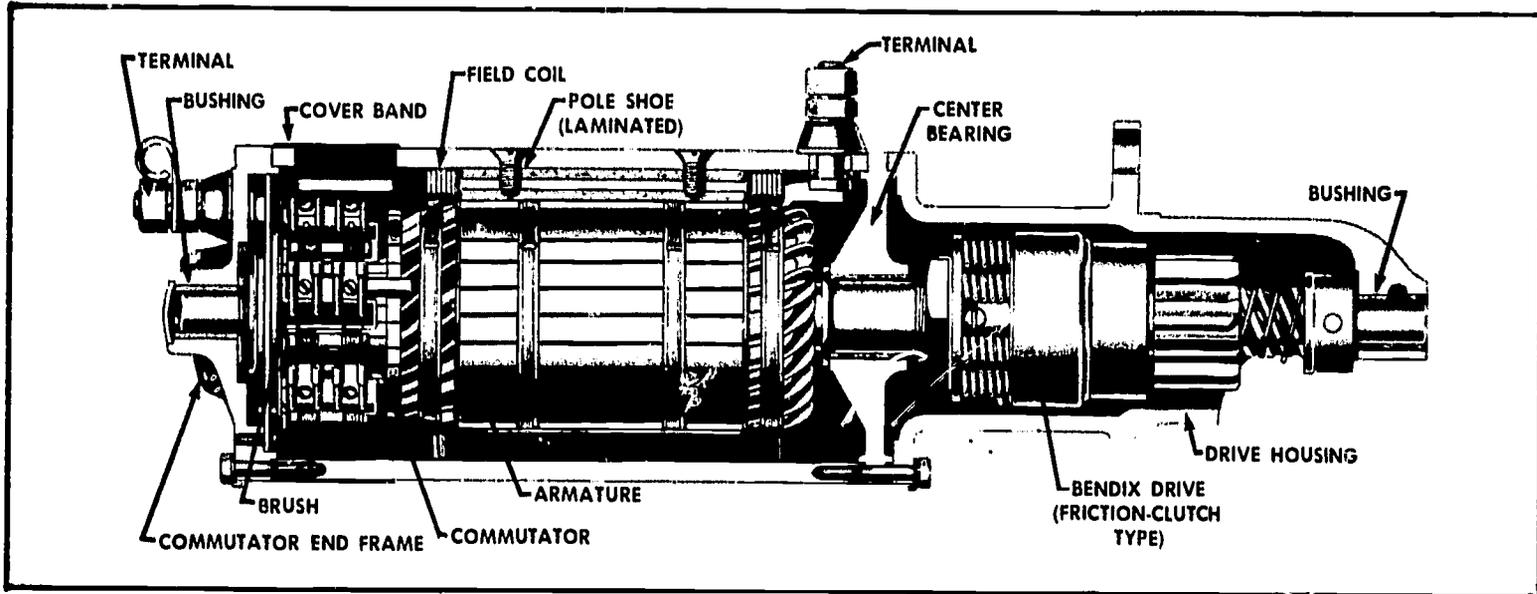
Cutaway view of a Bendix Cranking Motor.
